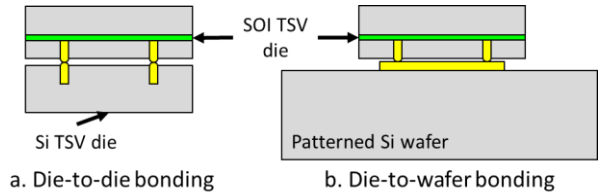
Filled and bumped SOI TSV die bonded to a) filled and bumped Si TSV die and b) patterned Si wafer.
